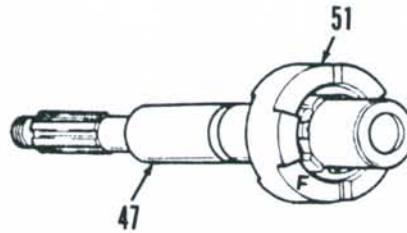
Install dog clutch (51) on propeller shaft (47) so the "F" mark is facing forward.
